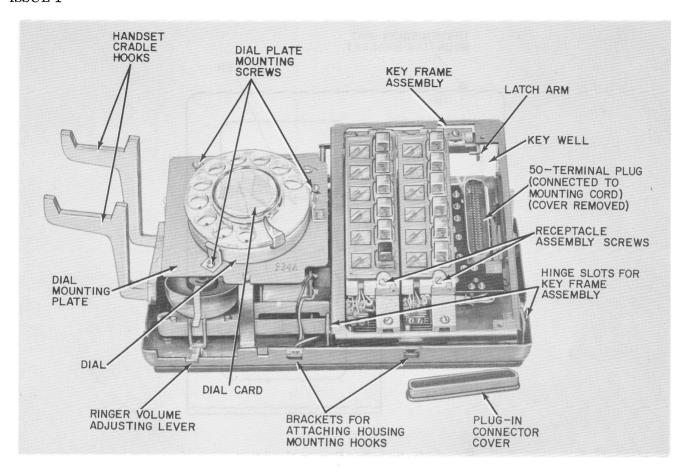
Rotary Dial Type 860B Key Telephone with Housing Removed.
